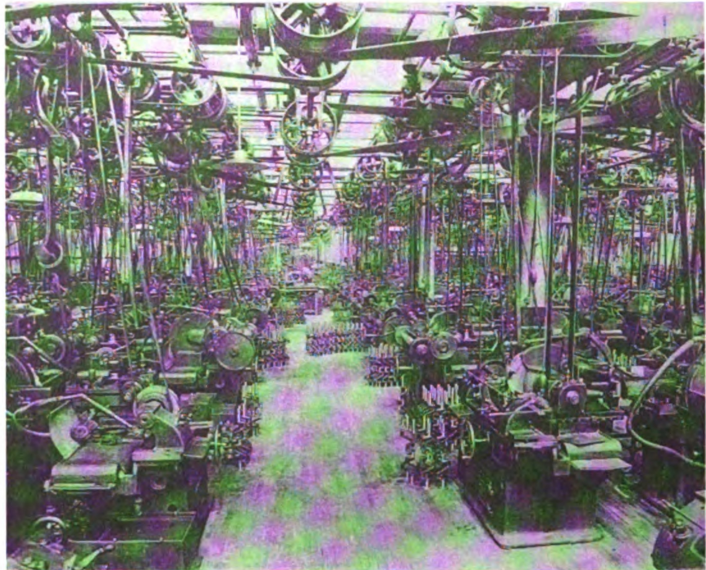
Photo of Highland Park's crank shaft machining area. These machines were powered by an overhead drive belt system.
